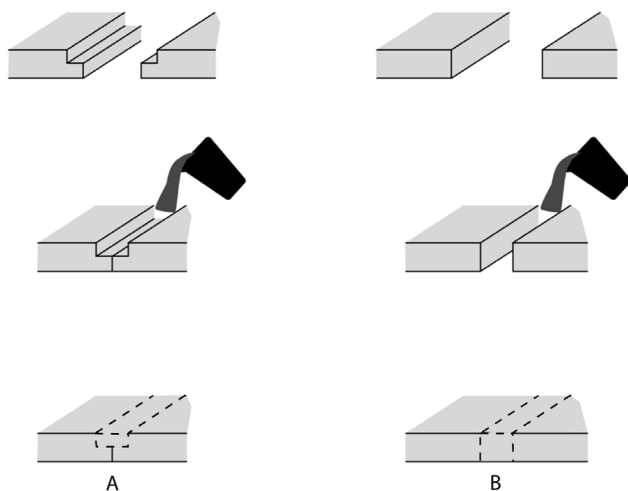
Two ways of preparing the primary castings for welding. A: the base metal is cut away to half its thickness to make a channel through which the molten bronze can run; B: a space is left between the two parts to be joined and the welding metal is directly poured through this space.
